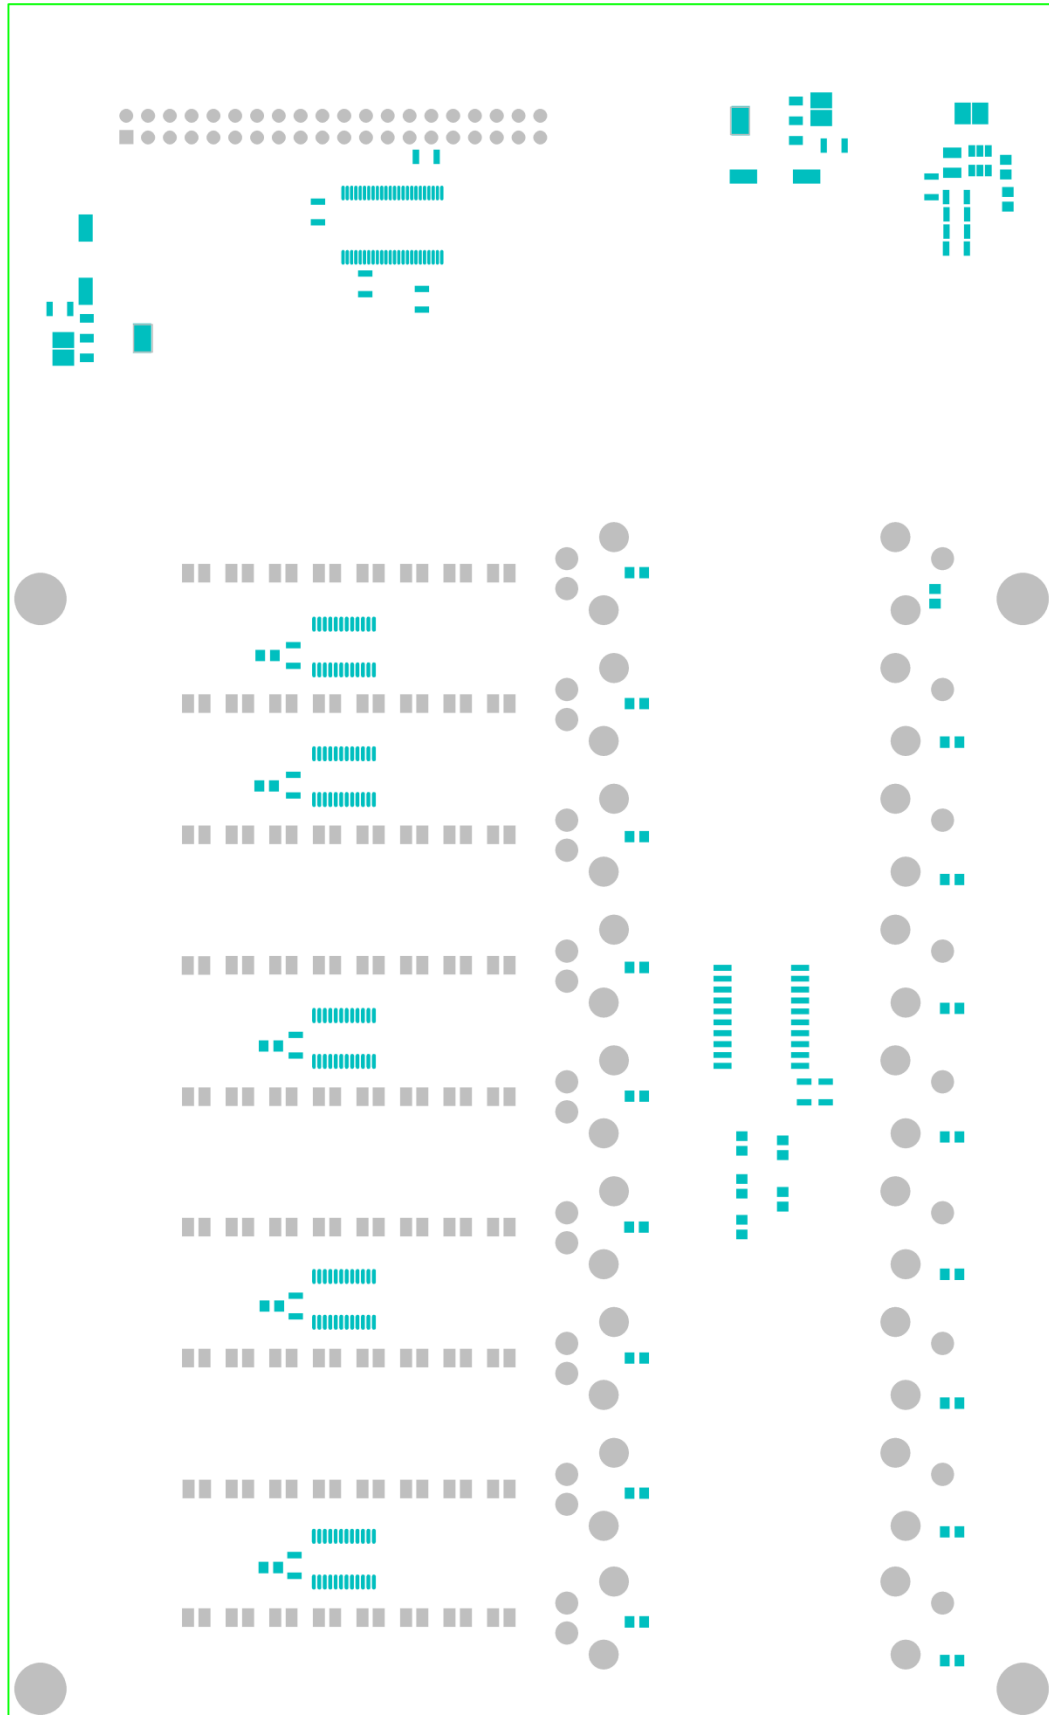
Peripheral Interface Board Artwork, bottom layer solder mask
